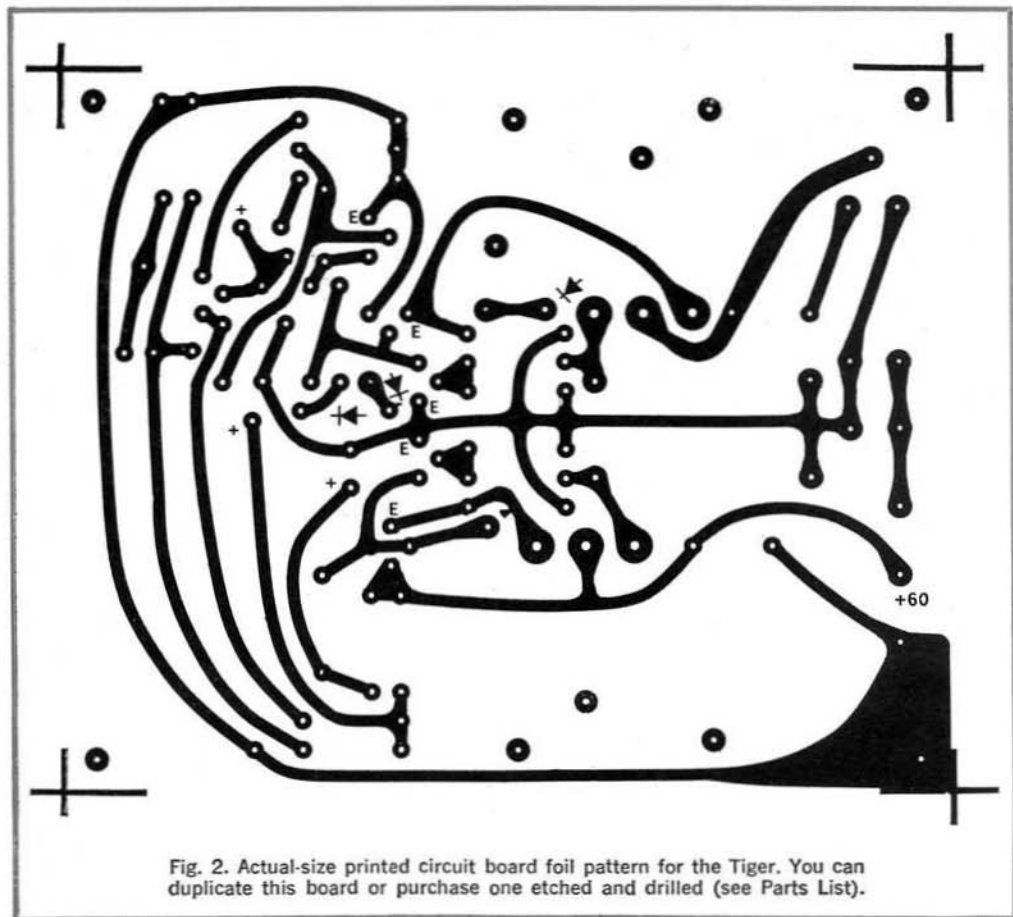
Actual-size printed circuit board foil pattern for the Tiger. You can duplicate this board or purchase one etched and drilled (see Parts List).
